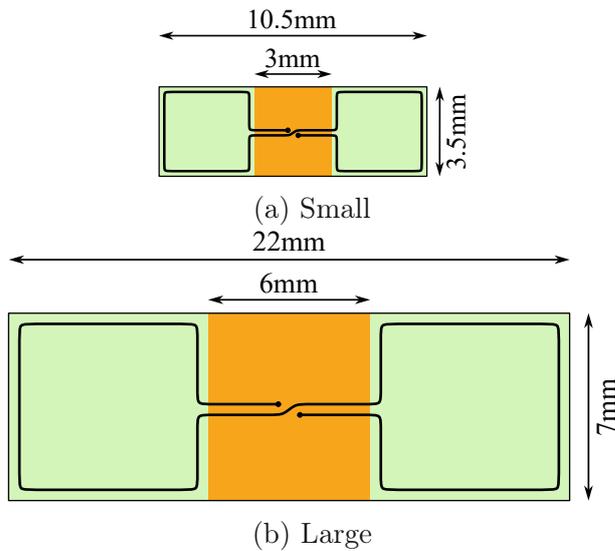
Dimensions of the Infinity Sensor version 1
